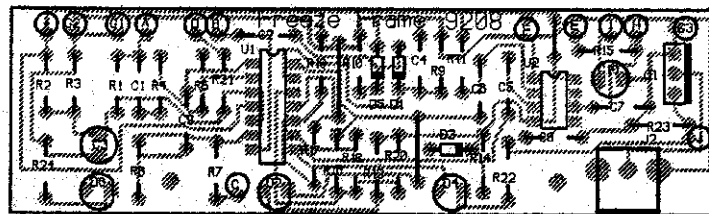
This parts placement drawing with phantom circuit board conductors may be useful if you have to trace out the circuit.
